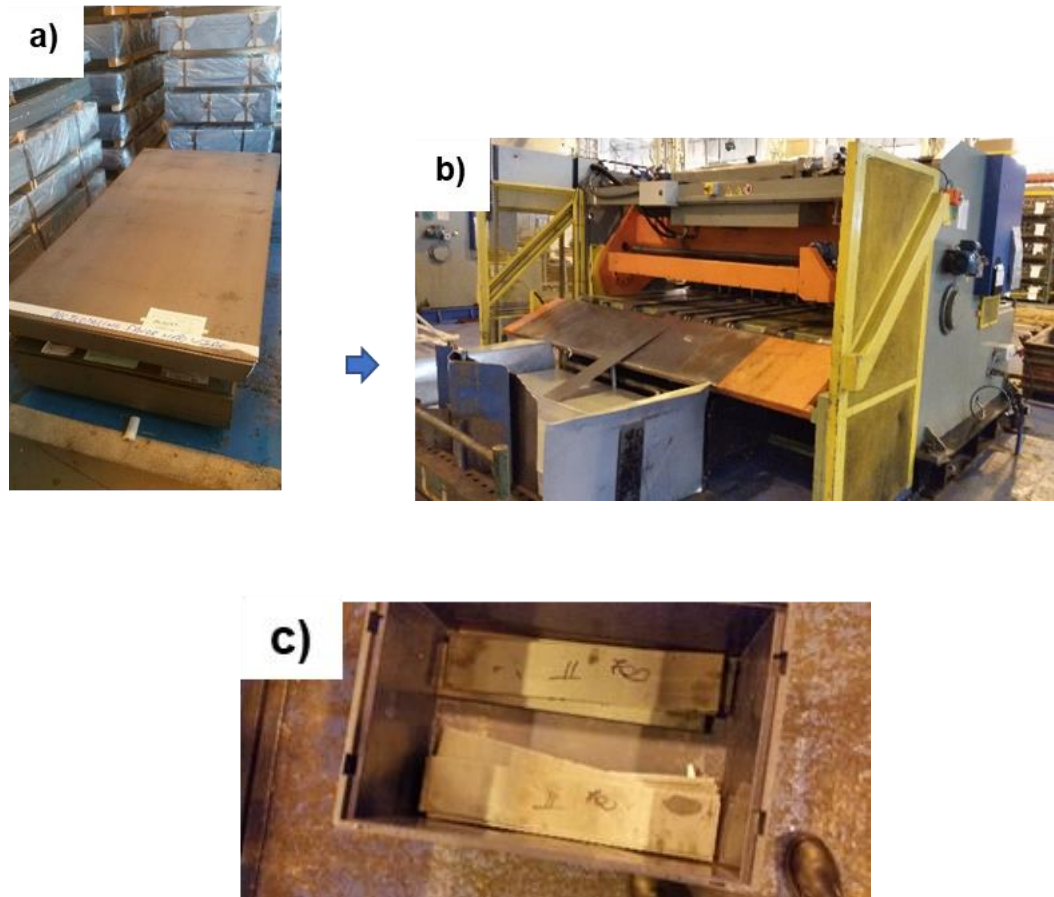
a) as-received plates; b) hydracult guillotine; c) final specimen ready to be welded.
